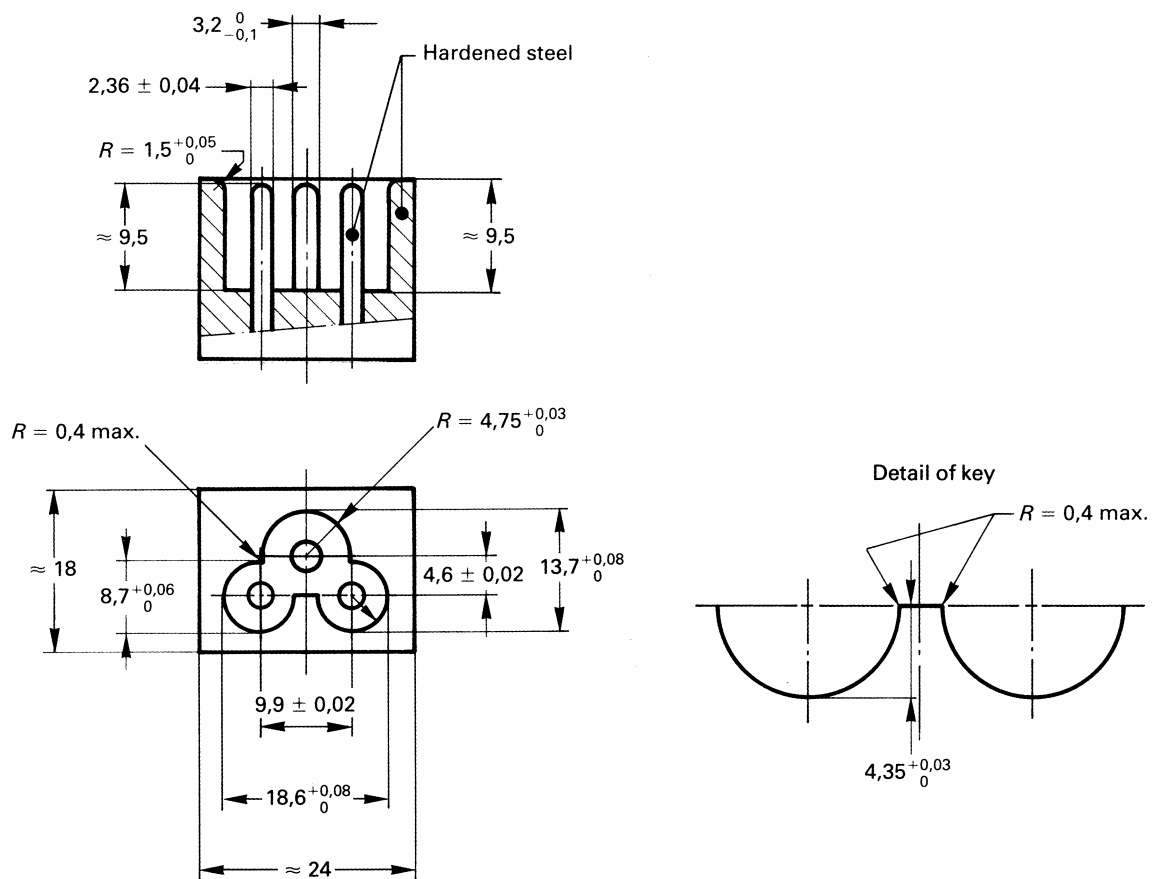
"NOT GO" gauge for connectors to standard sheet C1 (see 9.4)
